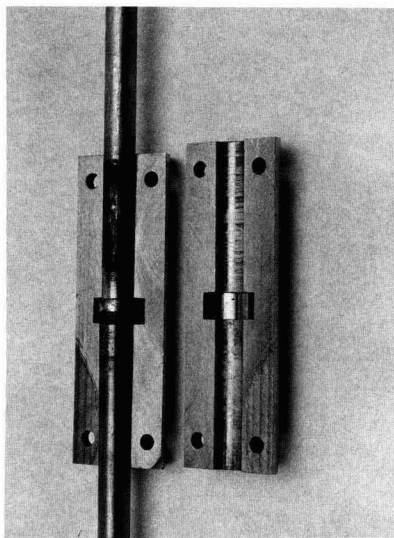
Shaft coupling of the dispenser-stirrer; open view.
